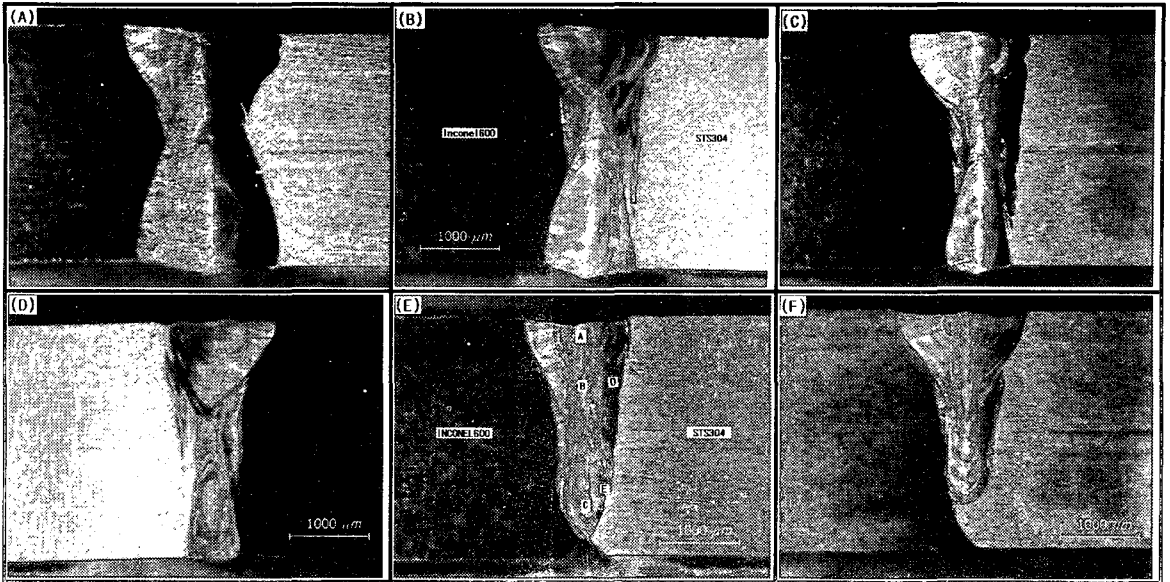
Dissimilar metal Welding of the Cross-section by laser welding speed ($z=-1.0\text{mm}$, $P=1.4\text{kW}$)
